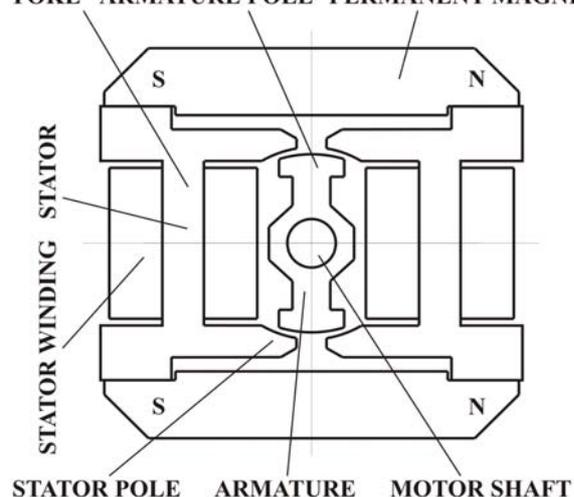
Cross-section of a high-speed limited-angle torque motor actuator.
